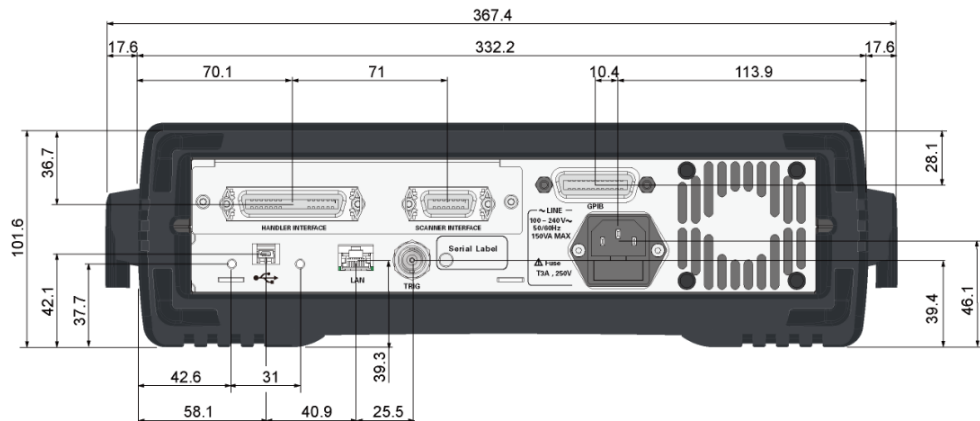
Dimensions (rear view, with handle and bumper, in millimeters, nominal)
